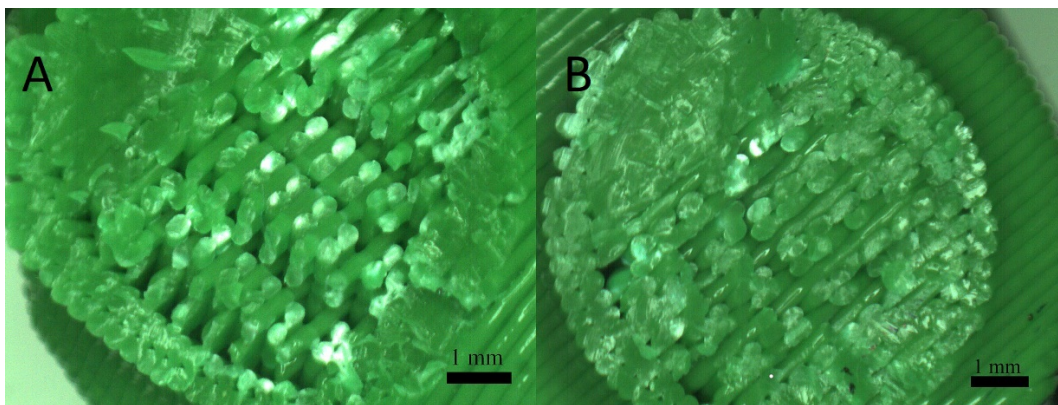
Fractographies of PLA specimens printed at the same conditions of Timberfill pieces with infill pattern. A) Rectilinear. B) Honeycomb.
